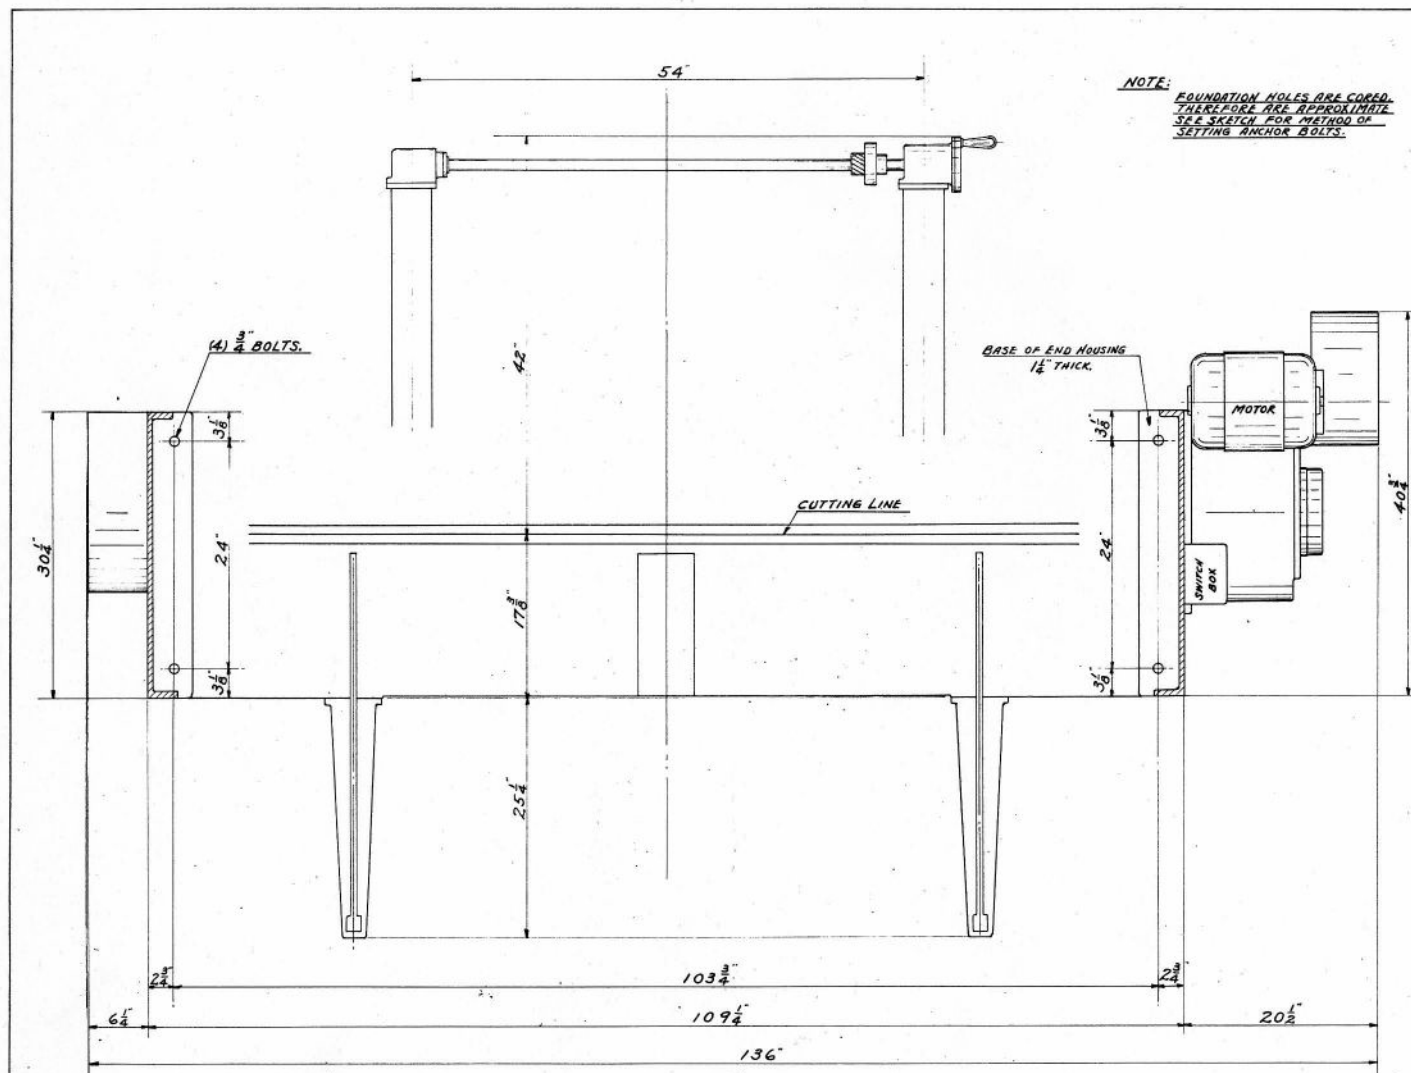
FRONT - BACK GAUGE ASSEMBLY
